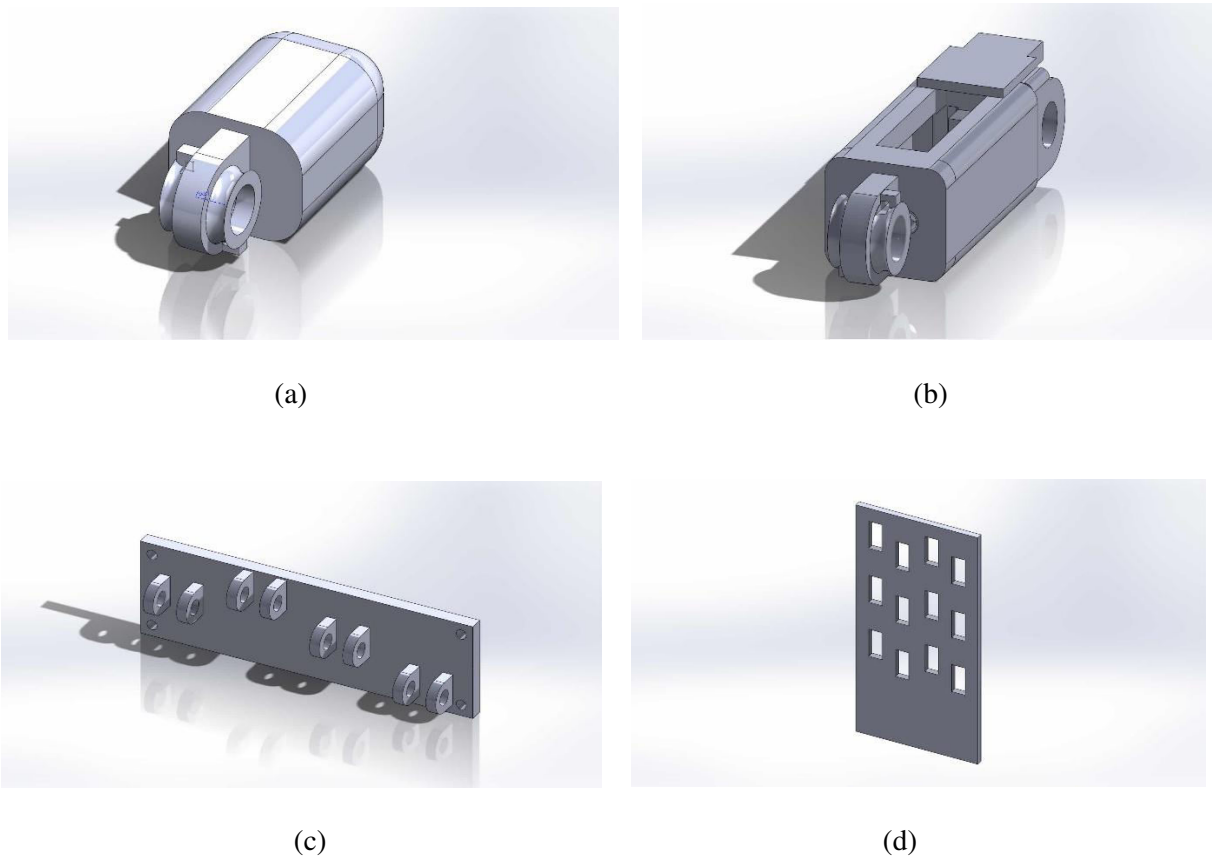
CAD models of the finger and palm. (a) Distal end, (b) proximal end and middle part, (c) Base for fingers (palm) and (d) motor casing
